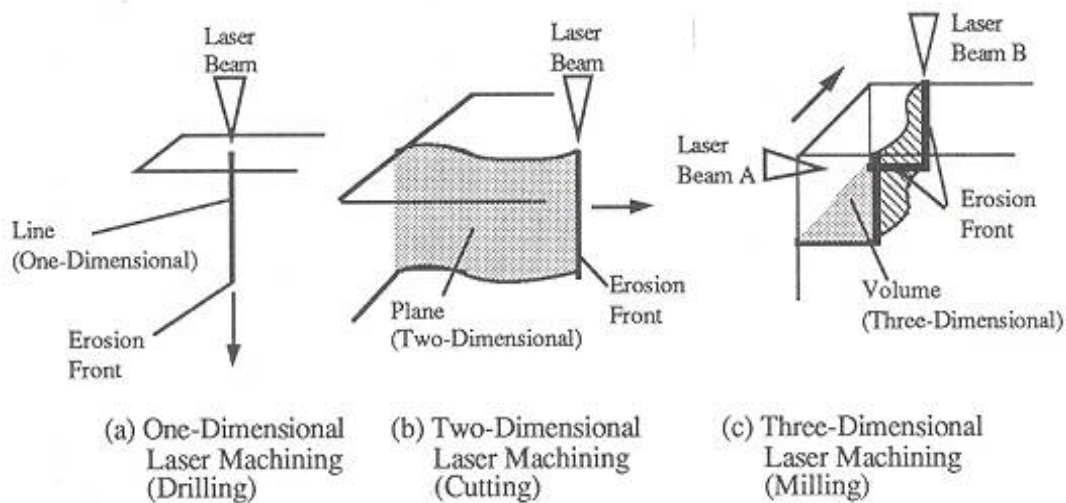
Schematic of one, two, and three-dimensional laser machining [1]
